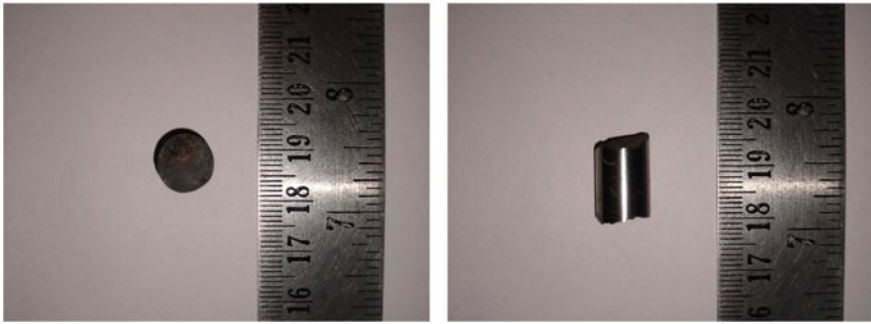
EDM cut decanned induction sintered consolidate produced using 16 mm diameter die
